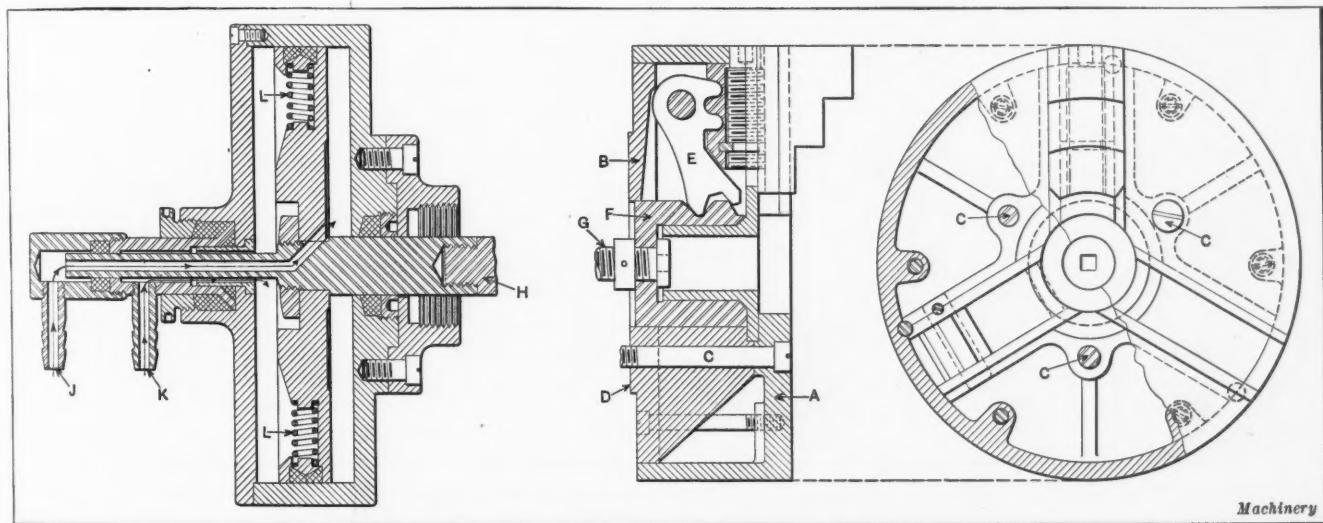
American Double-acting Air Cylinder and Three-jaw Universal Chuck
